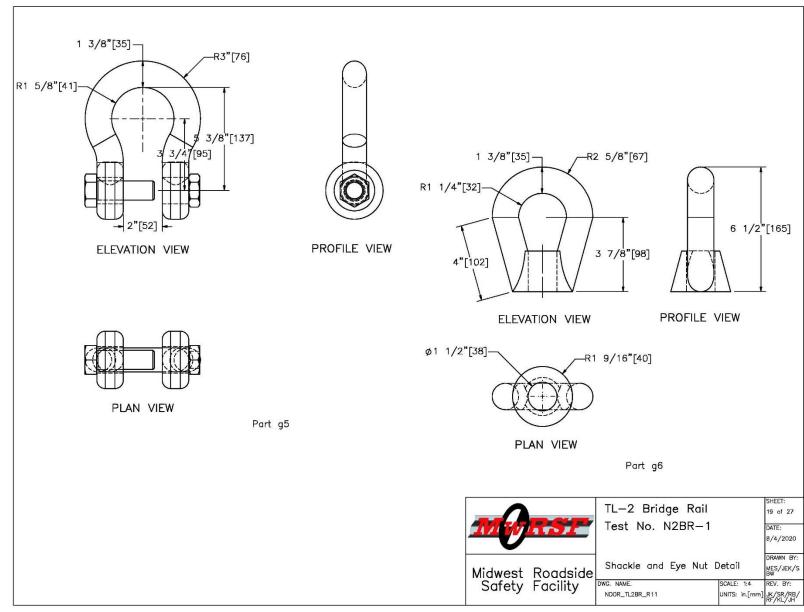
Shackle and Eye Nut Detail, Test No. N2BR-1
